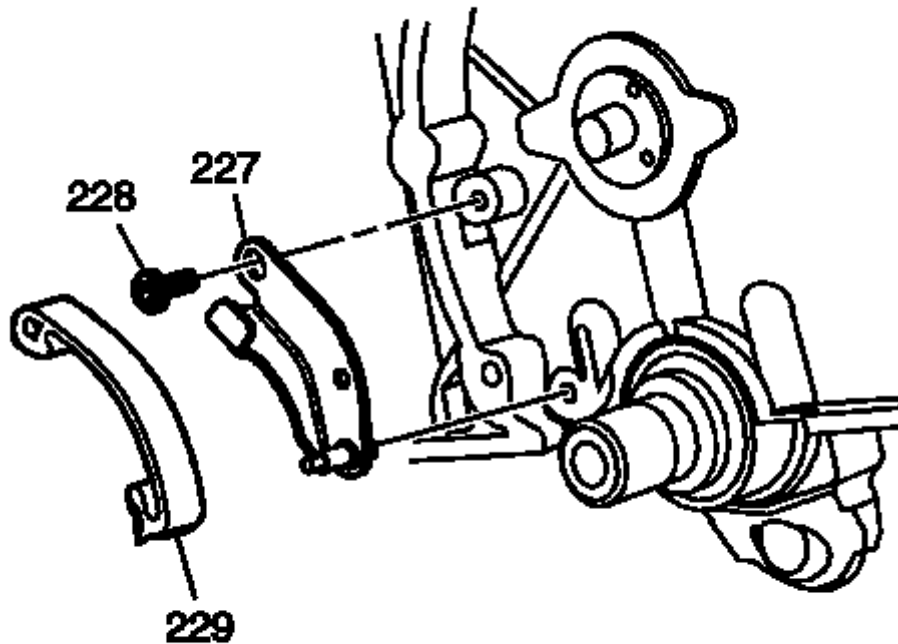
View Of Timing Chain Tensioner Bracket, Bolt & Shoe
